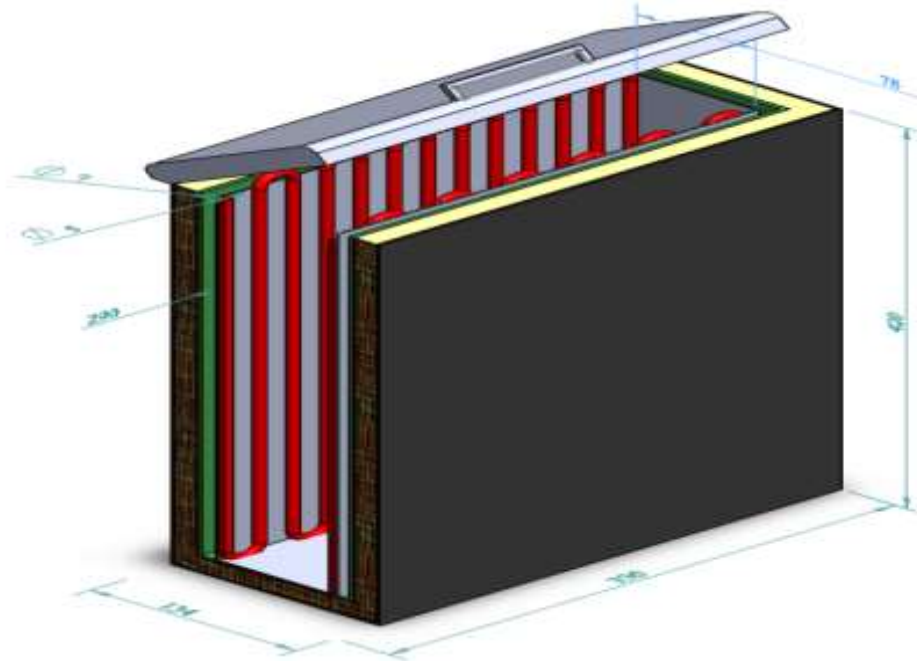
Isometric cut view of ice storage tank and Evaporator assembly
